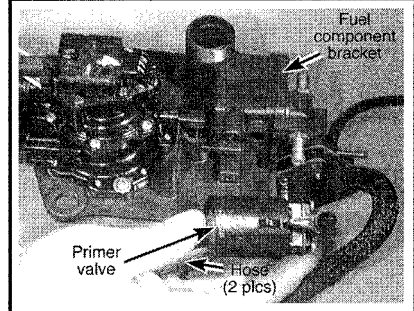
Primer valve mounting will vary, so be sure to tag all hoses
